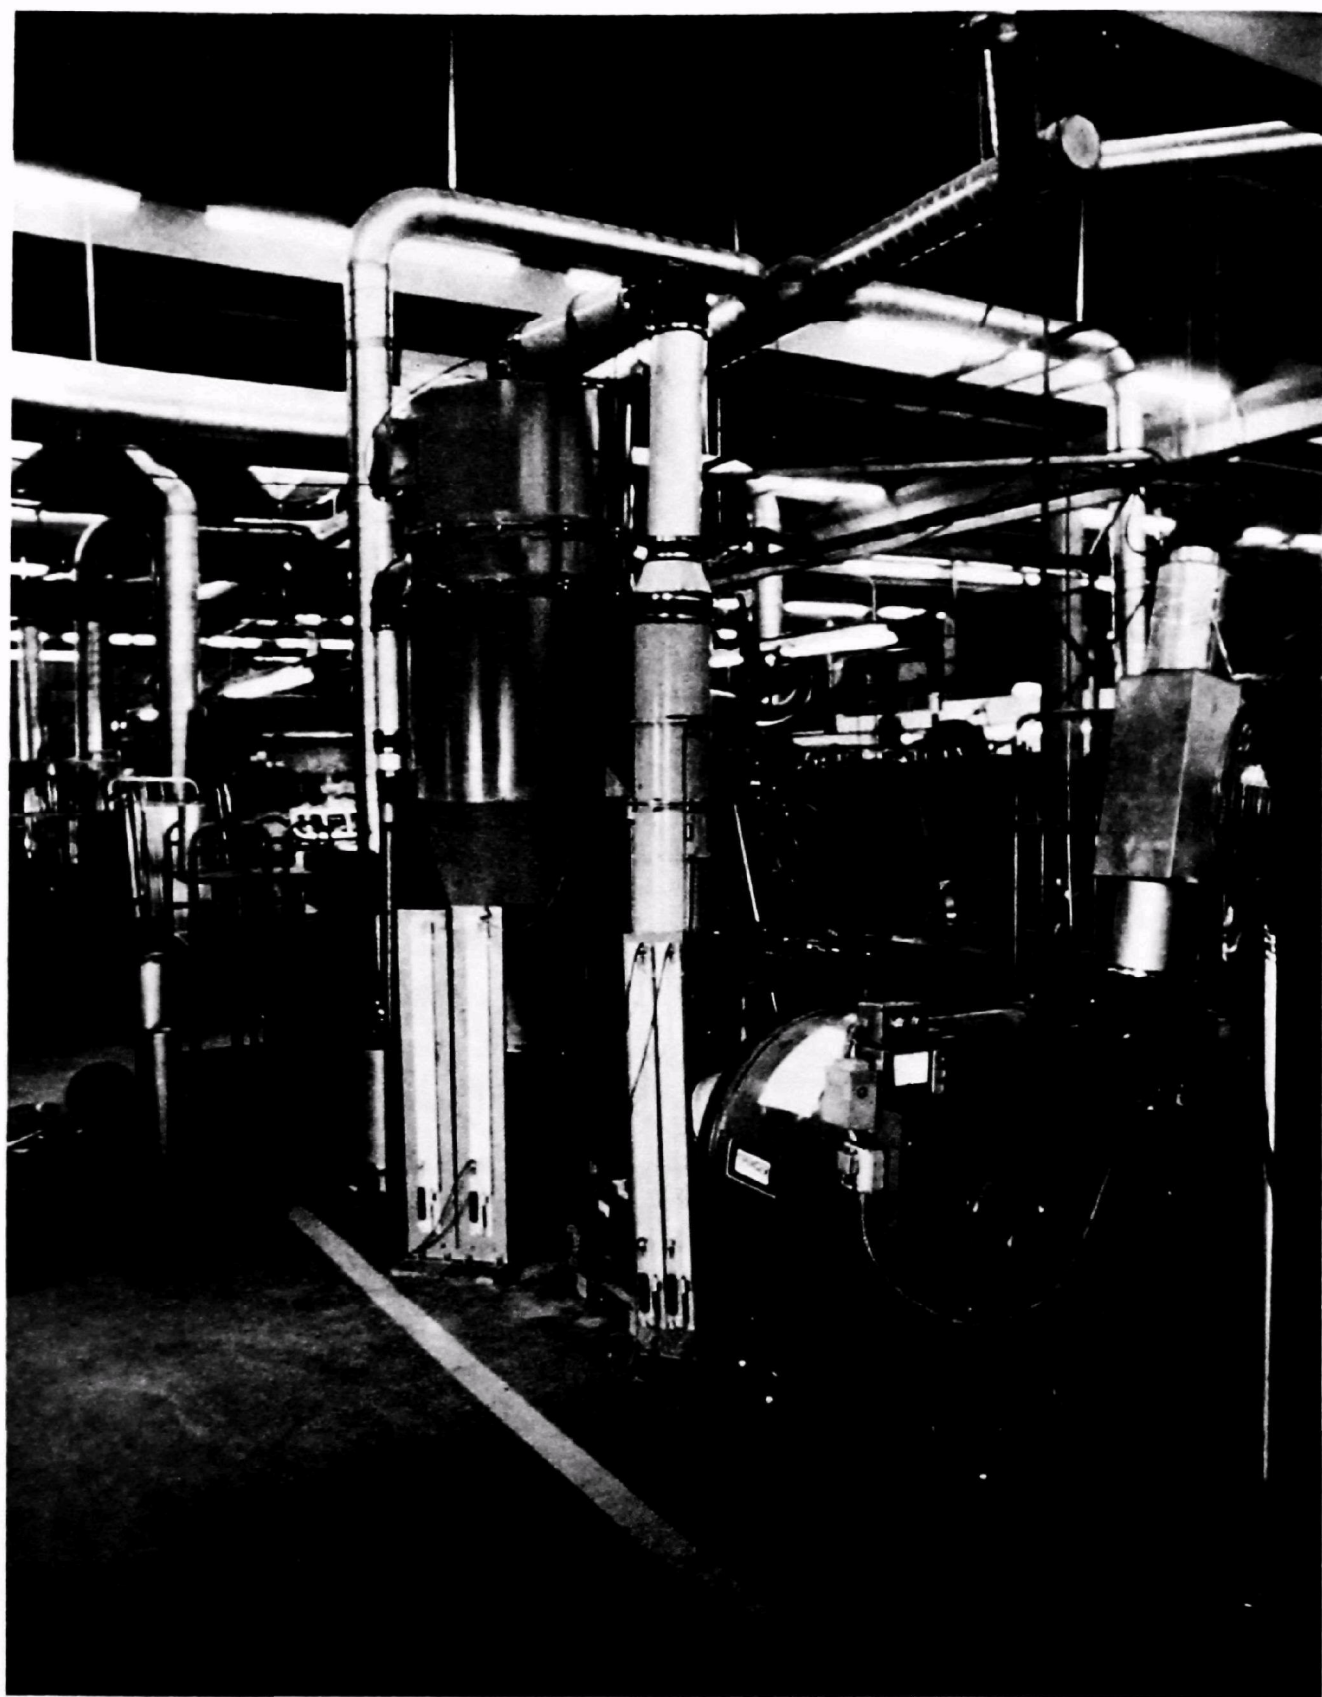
Installation at Cornelius Company - Welding Fume
